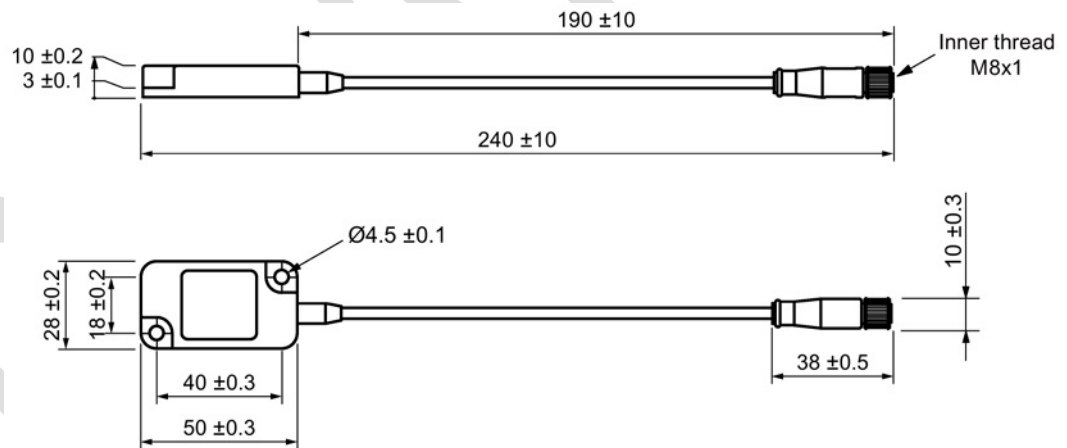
Dimension drawing ANT 3 7 ANT 3S
